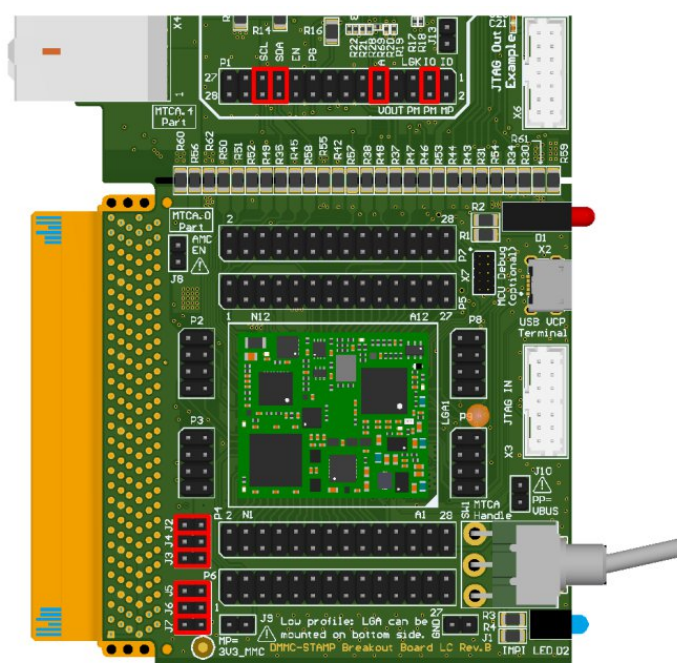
DMMC-STAMP-BoB default jumper settings (Rev. B)
